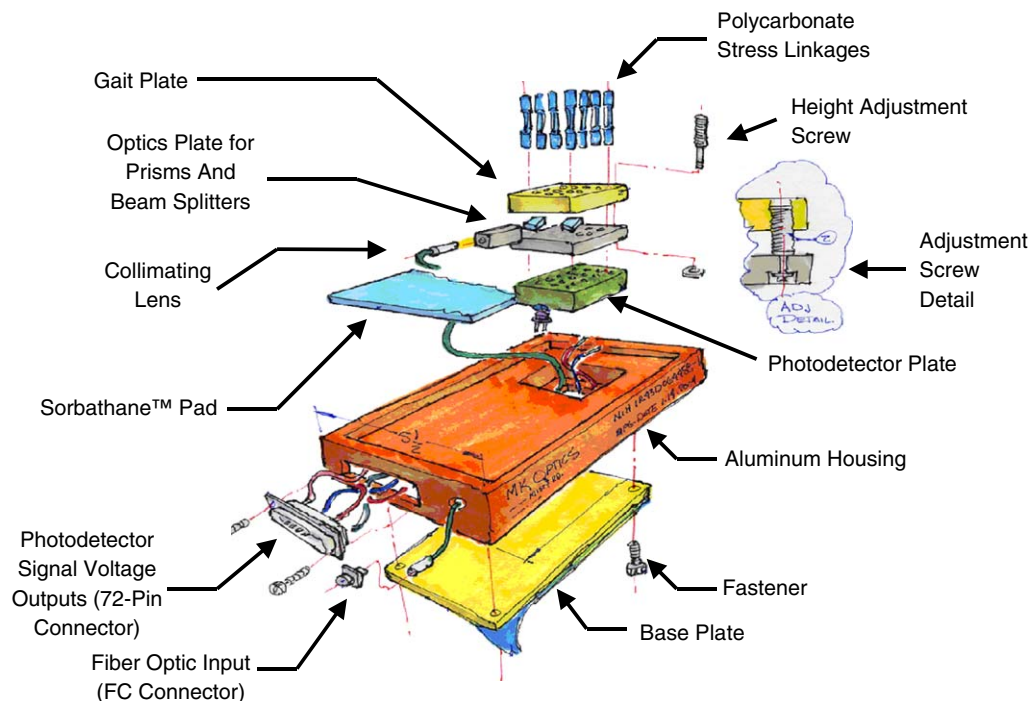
Exploded view of sensor assembly. This drawing includes (i) machined, extruded polycarbonate rod stress sensor linkage (shown at the top) and (ii) 2 mm prism and 2 mm custom cube beam splitter (small squares beneath the stainless-steel gait plate with holes to allow linkage contact with sole of the foot).
